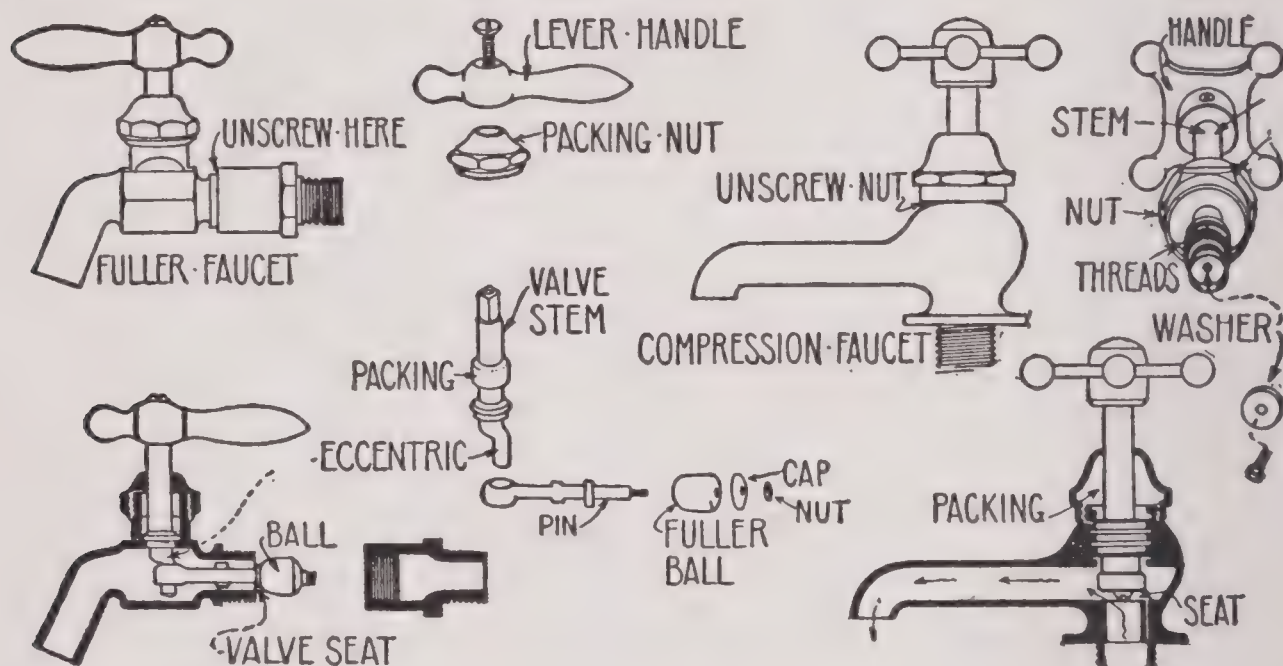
With a Handy Boy about the House there is no Excuse for Leaking Faucets.
